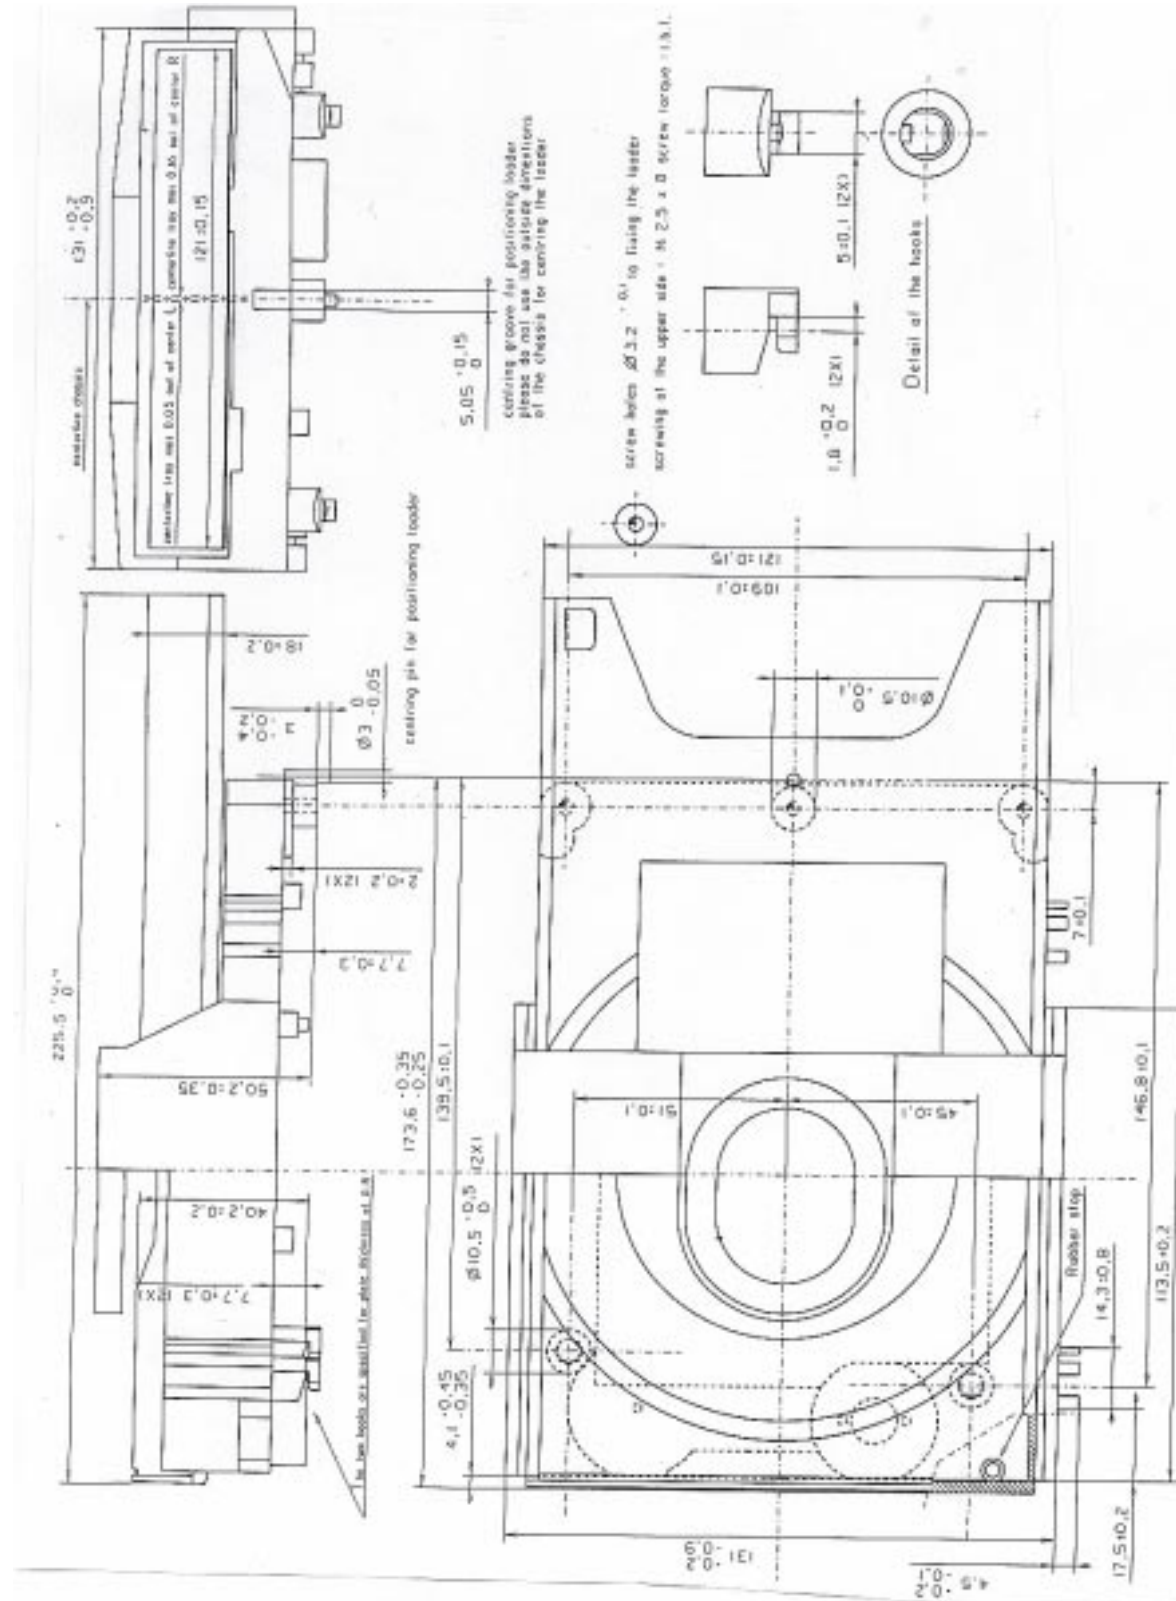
L1210/65 General Dimension (Drawing 2)
